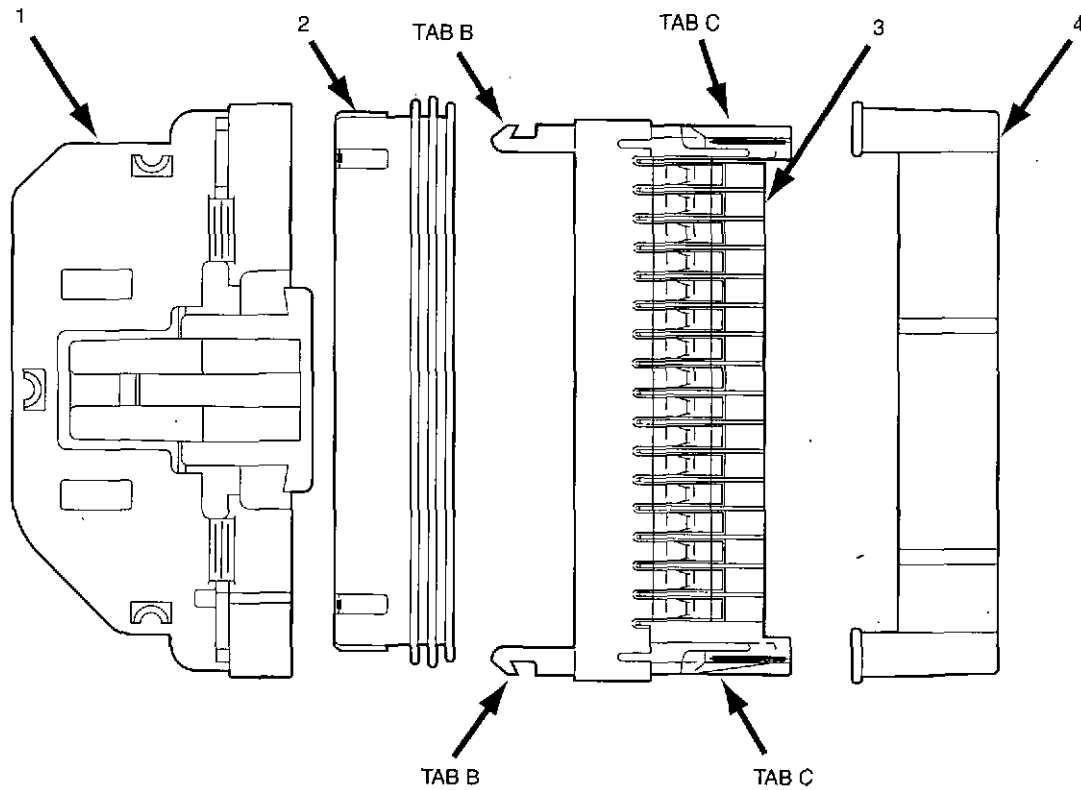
FIGURE A - EXPLODED VIEW OF CONNECTOR ASSEMBLY
